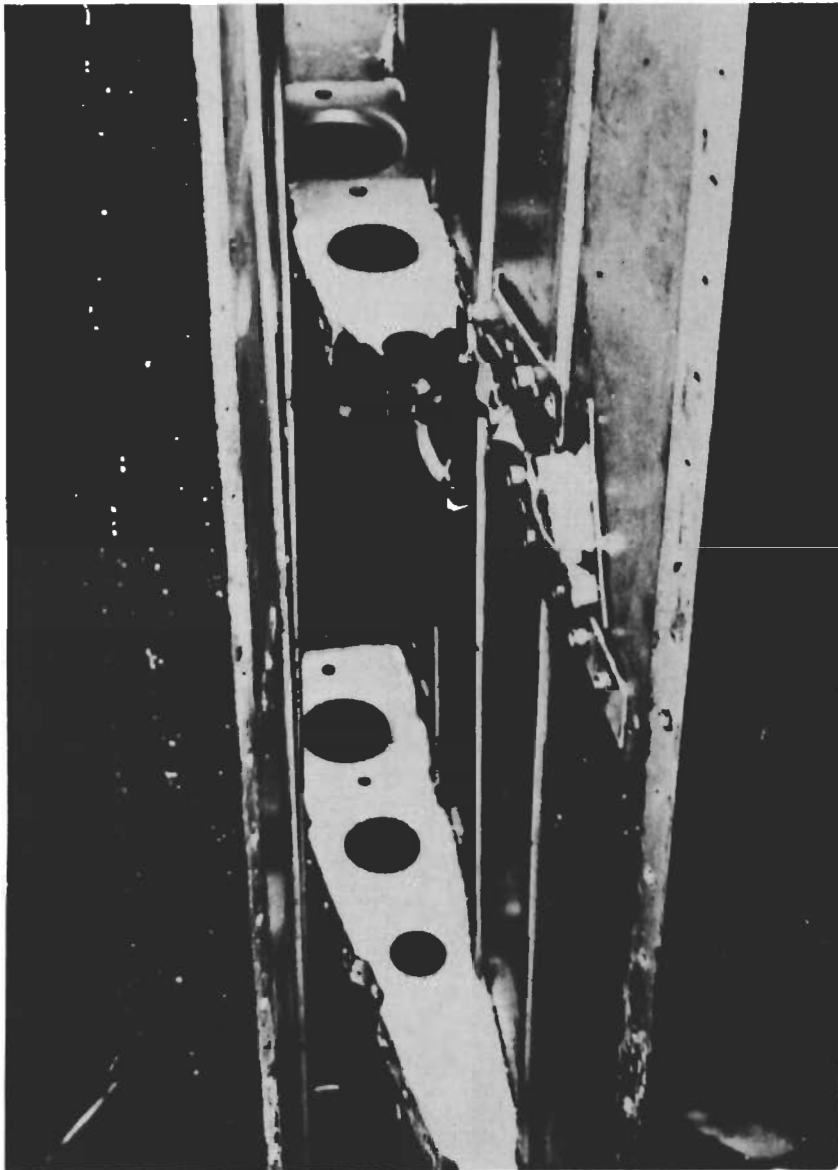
SPECIMEN DAMAGE - T. P. TRAILING RIB
